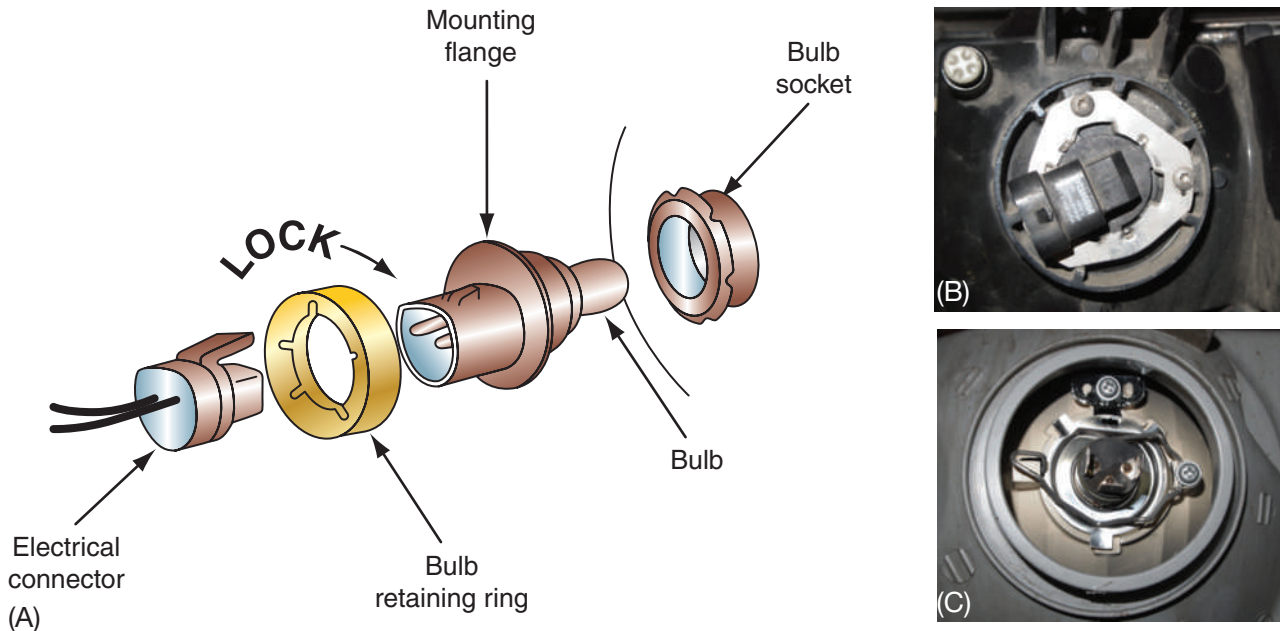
(A) Twist to unlock the retaining ring to remove the bulb. (B) Turn the bulb counterclockwise to remove the bulb from the housing. (C) Press and slide the wire bale out to remove the bulb.
